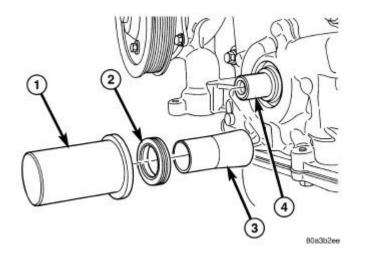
CRANKSHAFT FRONT SEAL INSTALLATION Courtesy of CHRYSLER LLC
